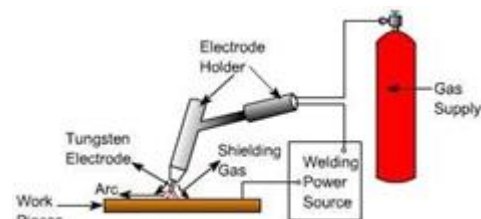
Schematic Diagram of TIG Welding System. [18]
